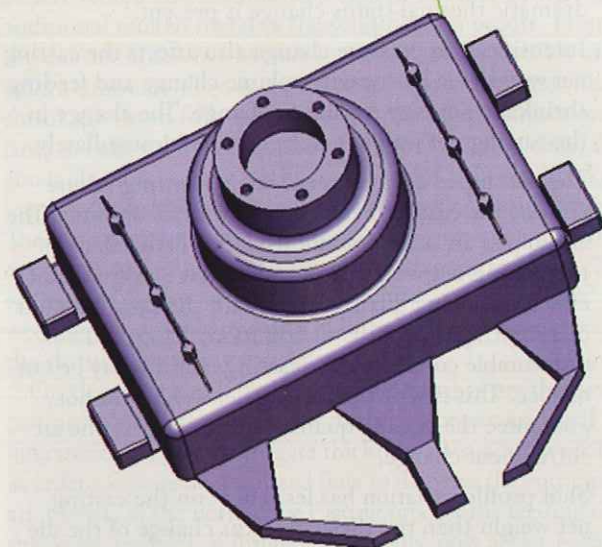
Bad runner design typical of what we see. Too many overflows also.
